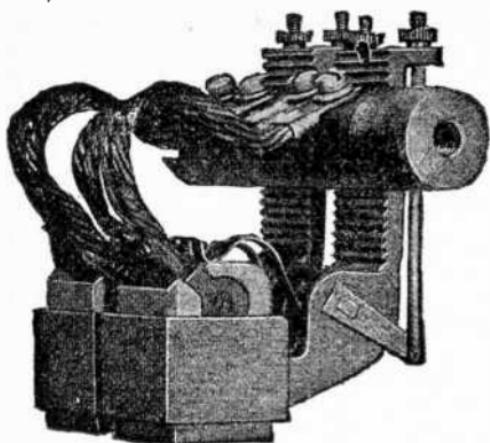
,049.—*Westinghouse synchronous converter construction 9. D.C. brush holder with brush and lifting lug.* The sliding shunt type is used arranged with a corrugated face; they are bolted to the brush holder bracket. These slots in the brush holder make it possible to place the holder at the proper distance from the commutator face. The spring is so arranged as to make it possible to maintain practically uniform tension through the entire wearing length of the brush. The brush holder spring and spring support are so located as to be protected from damage caused by any flashing which might occur at the commutator.
